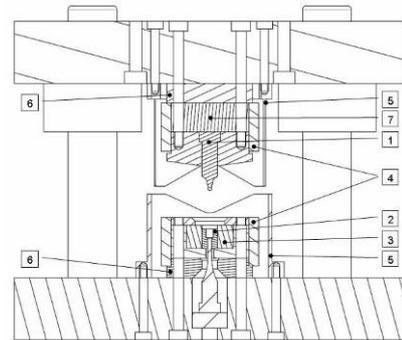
The tool-set for micro warm forming. 1) Punch 2) Die insert 3) Stress ring 4) Heaters 5) Thermal shield 6) Thermal isolation 7) Load distributor
